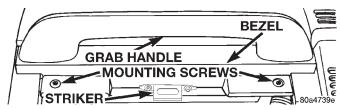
Instrument Panel Grab Handle Bezel Remove/Install
